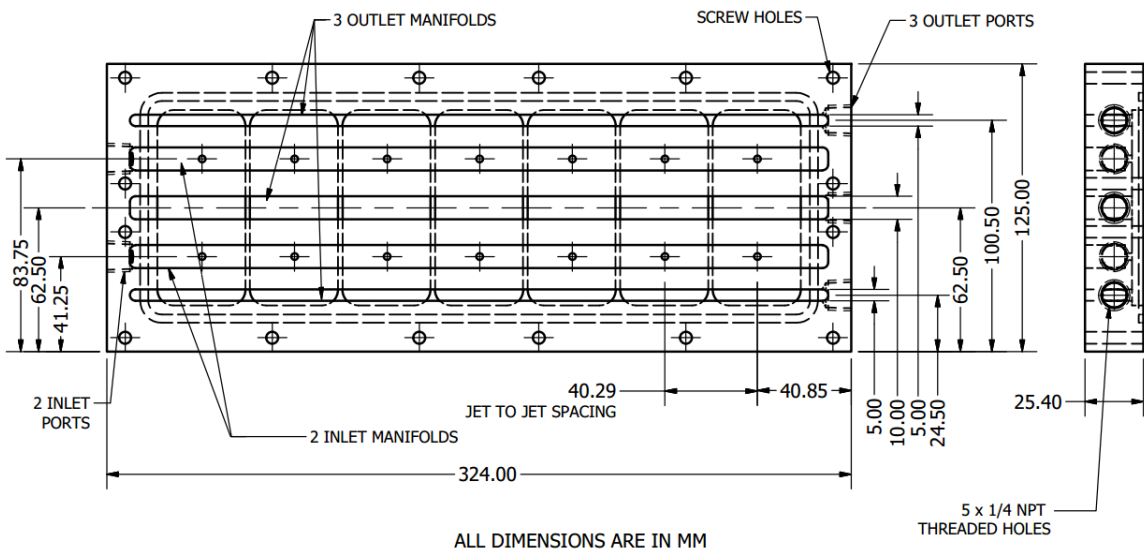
A CAD drawing showing the design features on the heat exchanger body's bottom surface.
